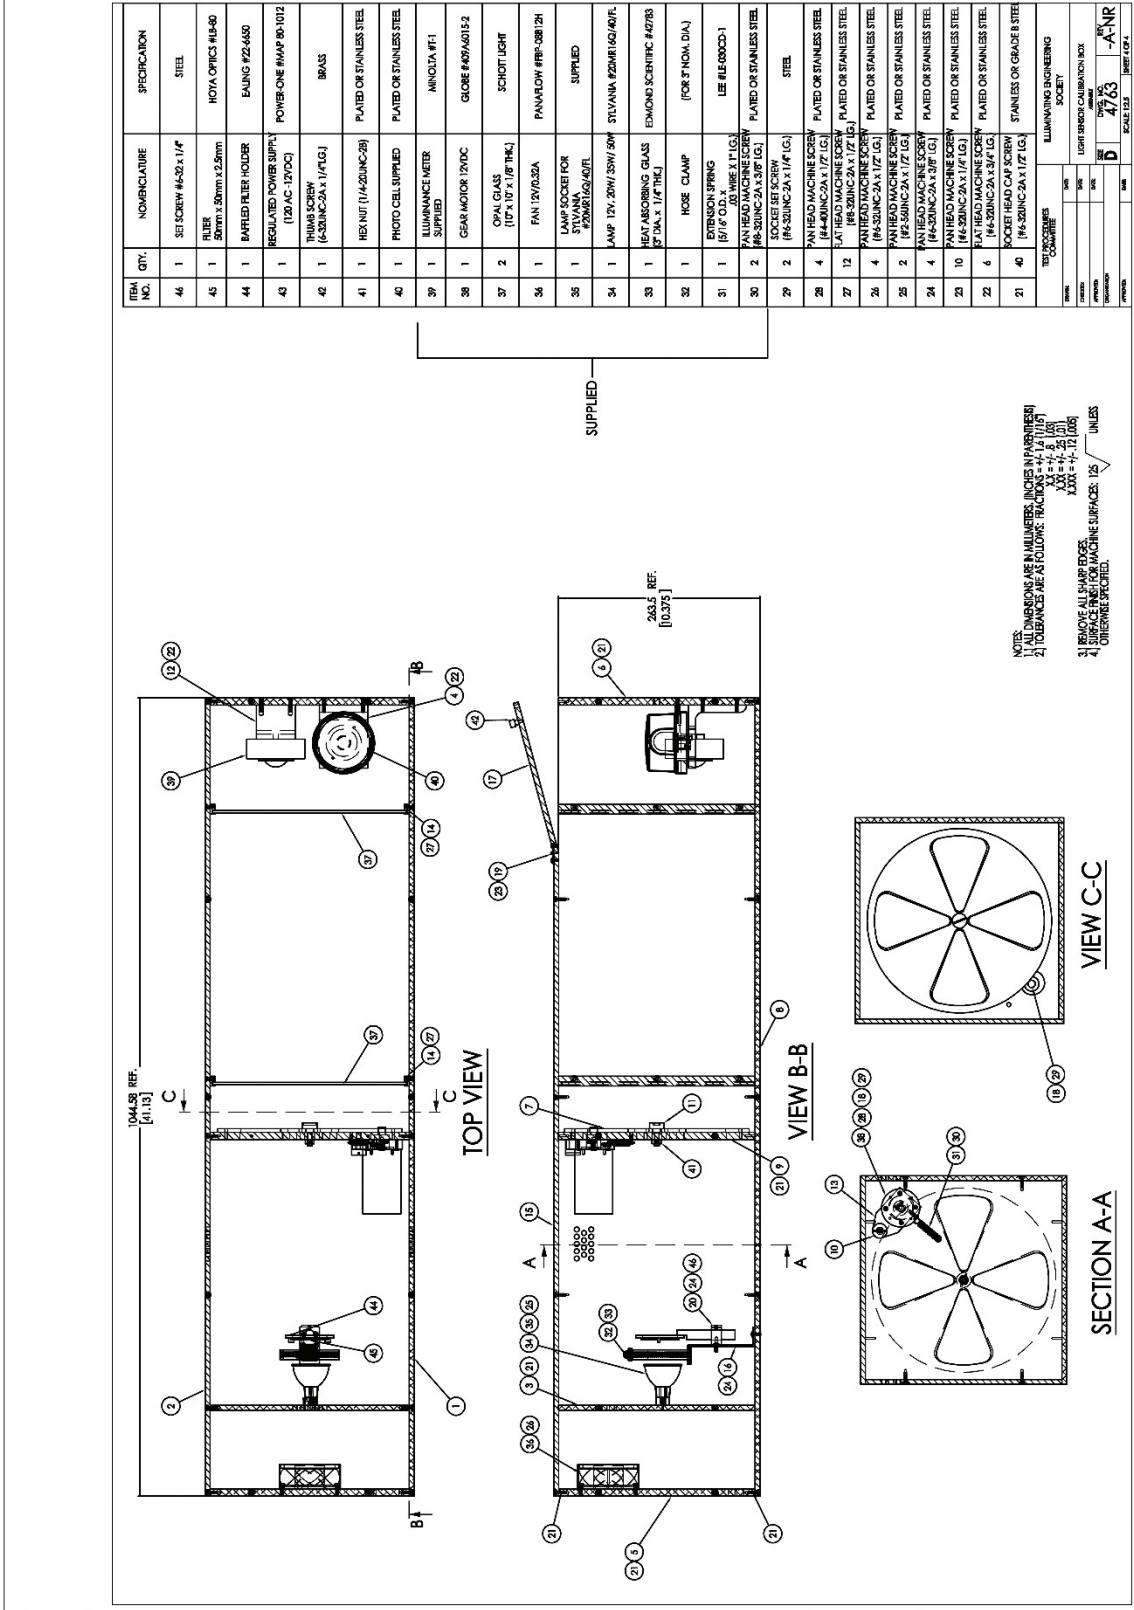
Assembly drawing of the test box, with an associated materials list.
